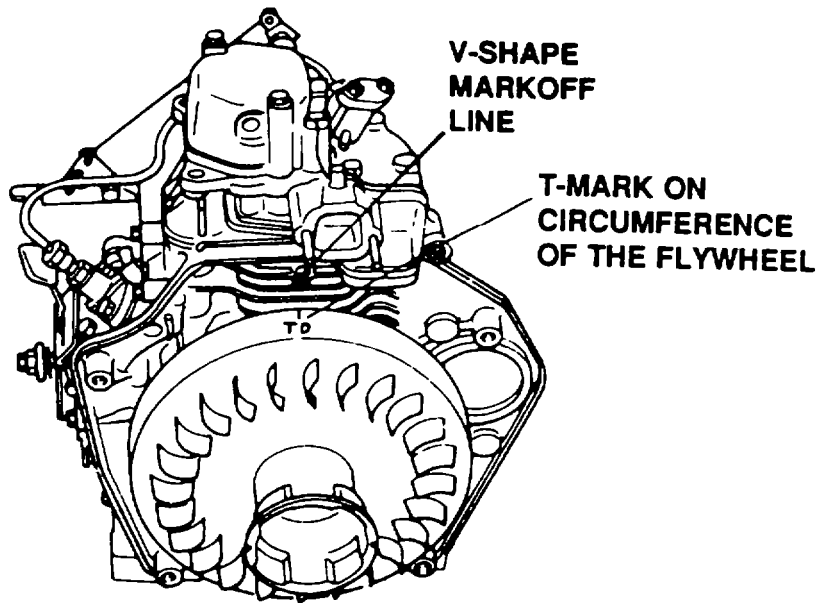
Alignment of Flywheel With Cylinder Block.
